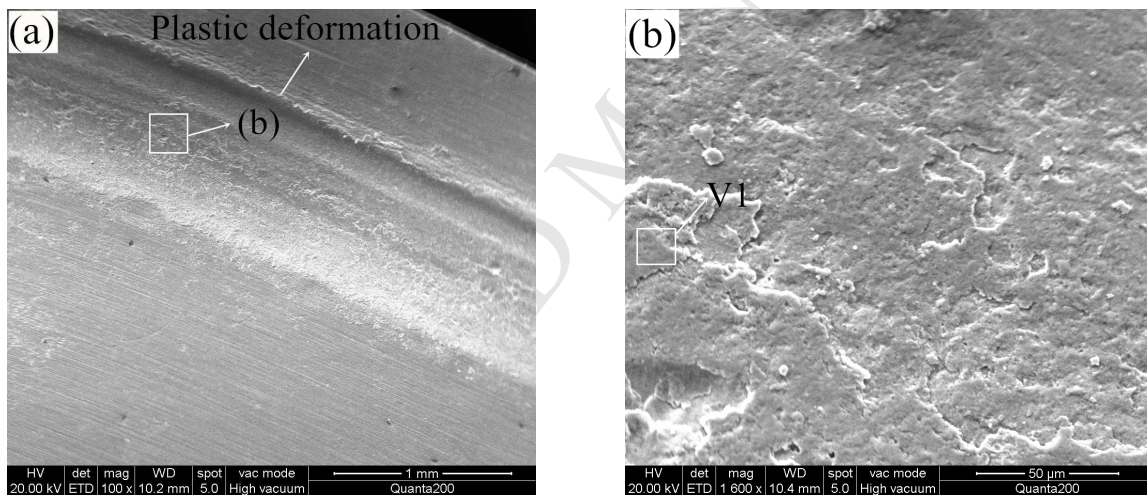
(a), (b) Worn surfaces of valve 1 seating face and EDS test area V1.
